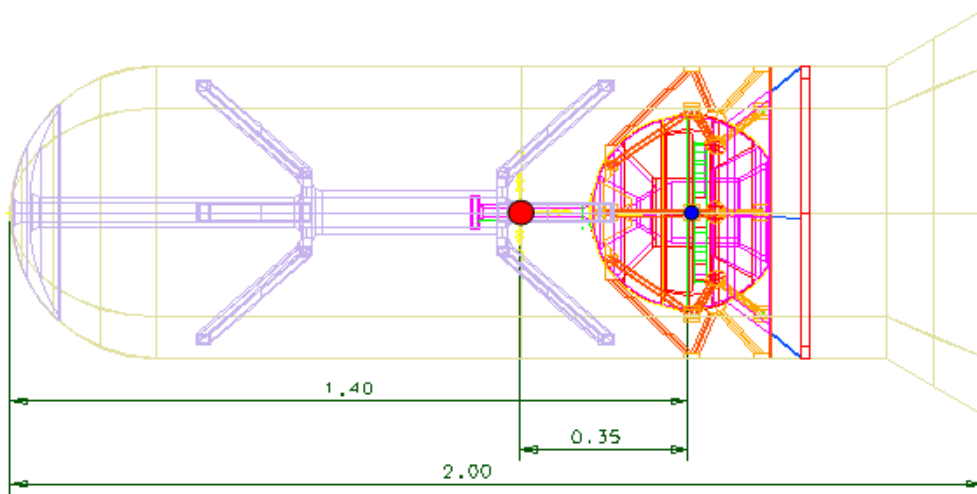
Design drawing of optimized capturing mechanism inside the ACCD geometry with major dimensions in [m] [6]
